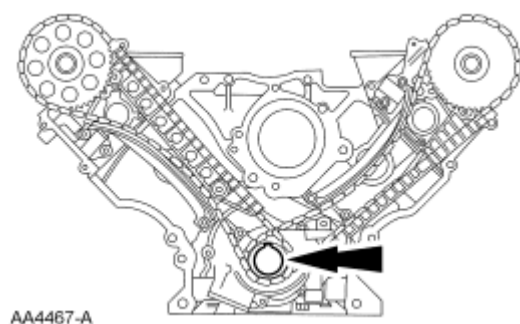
Crankshaft With Keyway At 12 O'clock Position
